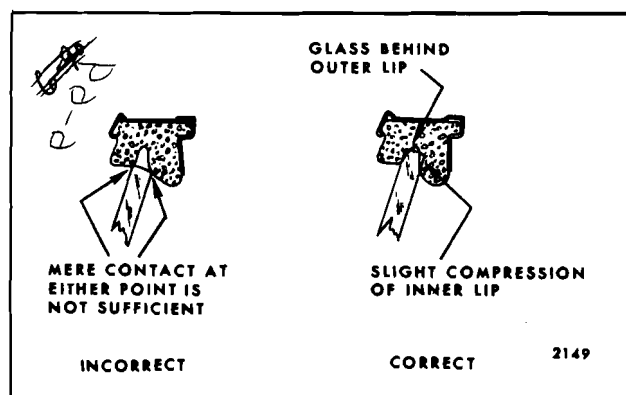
Window to Side Roof Rail Weatherstrip Alignment
